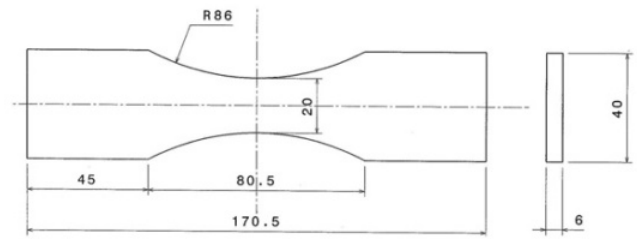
Tensile Specimen according to ASTM D-638- Type I (dimensions in mm).
